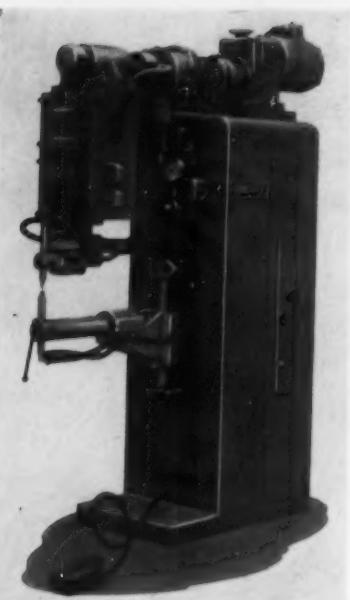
Motor-driven pitch-spot and seam welding machine
